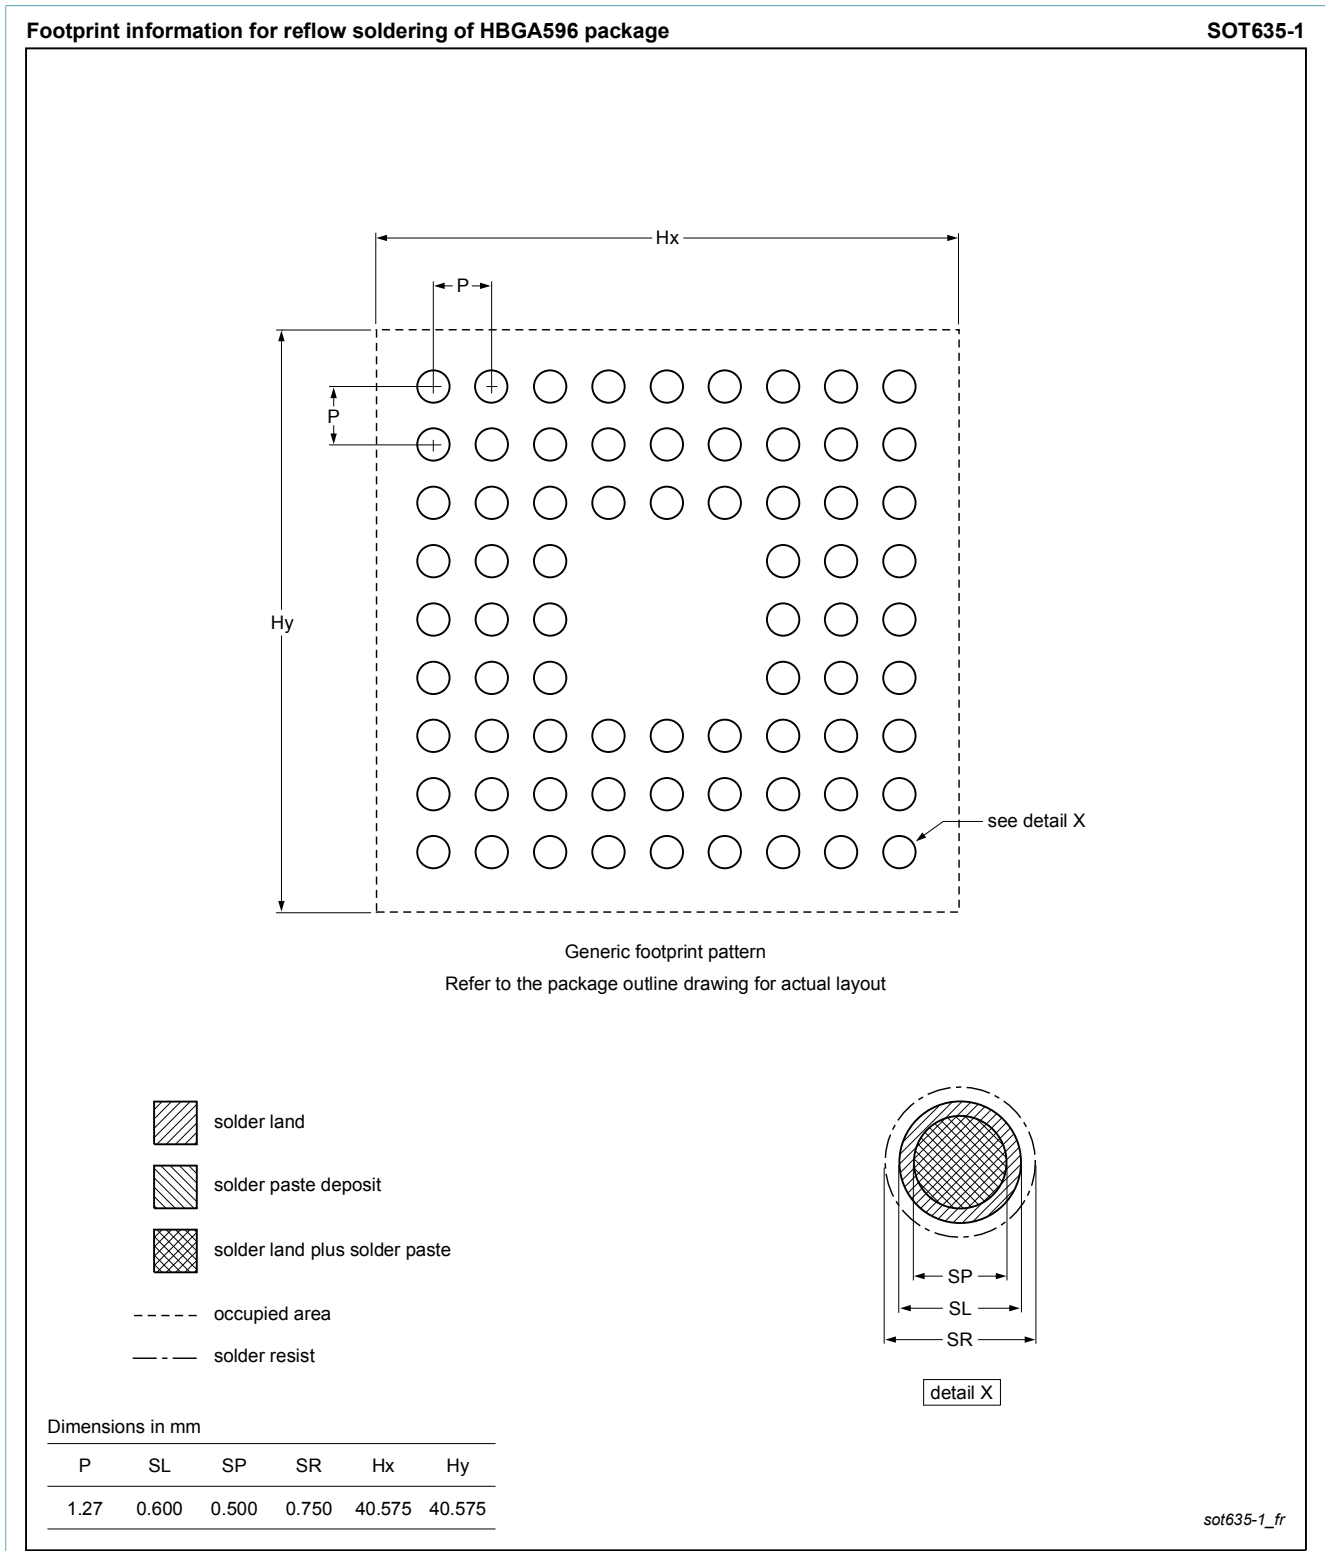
Reflow soldering footprint for HBGA596 (SOT635-1)
